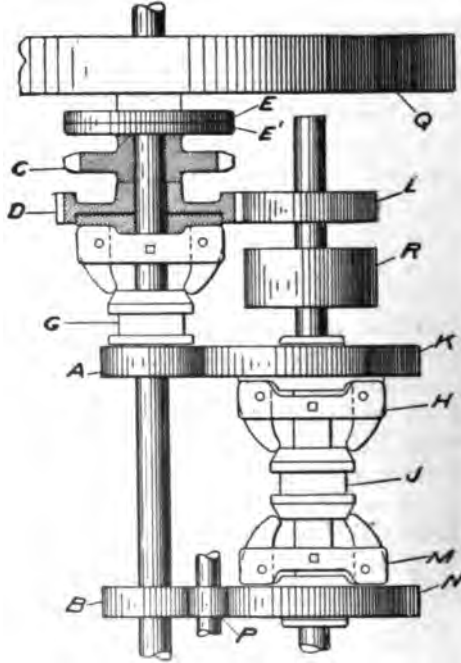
The Winton Change Speed and Reversing Gear. *A* and *B* are spur gears keyed to the crank shaft of the motor. *C* is a sprocket, and *D* a gear, of one piece with it, which turn loose on the main shaft. *E* and *E'* are friction discs, which connect *C* and *D* to the main shaft when the clutch, *G*, is thrown in. *K* and *N* are spur gears loose on the countershaft, and meshing with *A* and *B*, as shown. When clutch, *G*, is thrown in, the first speed forward is obtained; when clutch, *H*, is thrown in, the second speed forward; and when clutch, *M*, is thrown in, the reverse. The clutches, *H* and *M*, are operated by a lever actuating spool, *J*. *P* is an idler pinion reversing the motion transmitted from *B* to *N*. *Q* is the fly-wheel of the engine; *L*, a gear transmitting motion from the countershaft to the sprocket; and *R*, the brake drum.
